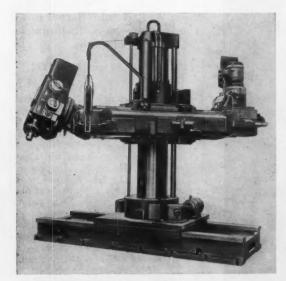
Kaukauna universal, radial drilling machine features a swiveling compound headstock
